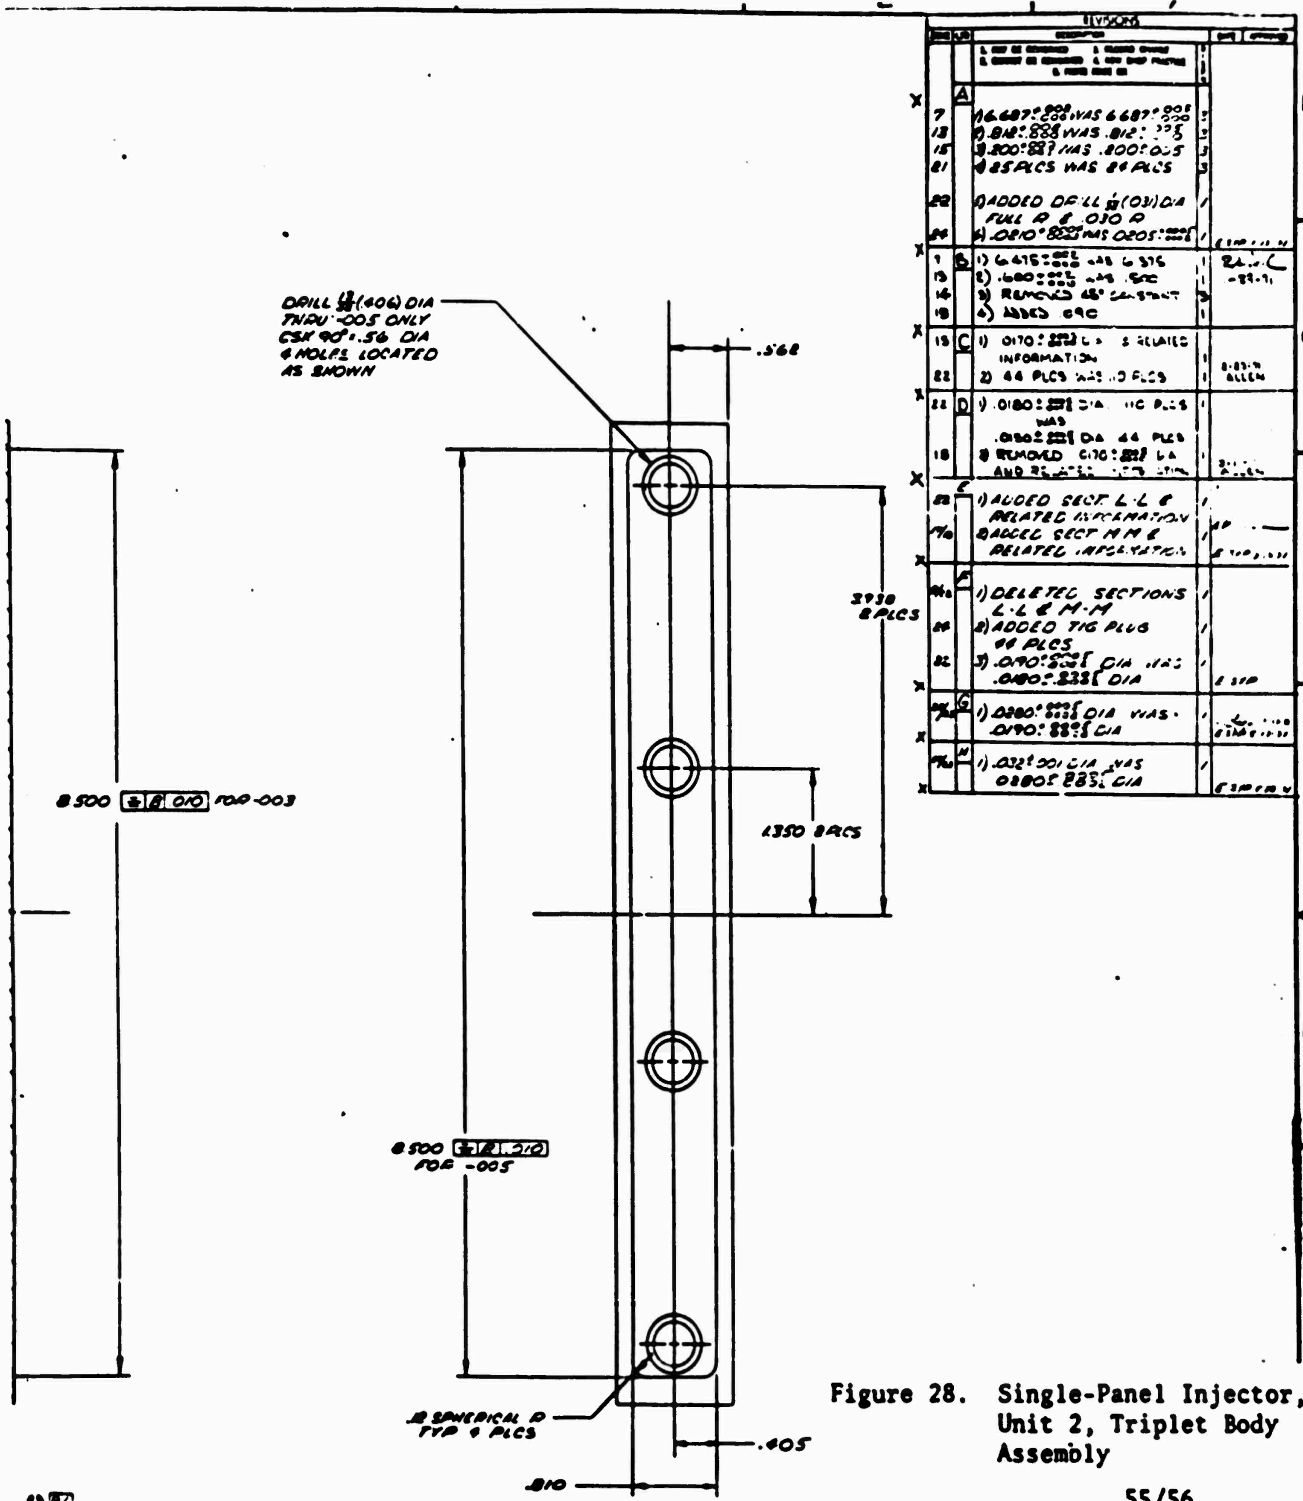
Single-Panel Injector, Unit 2, Triplet Body Assembly
